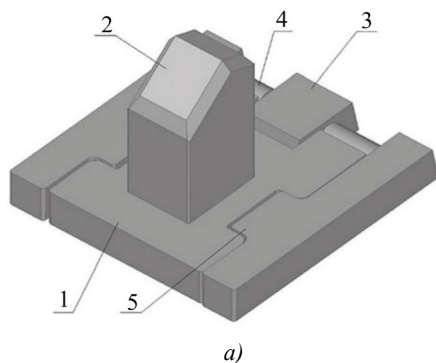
31901-NSB single welded folding stop [12]:
